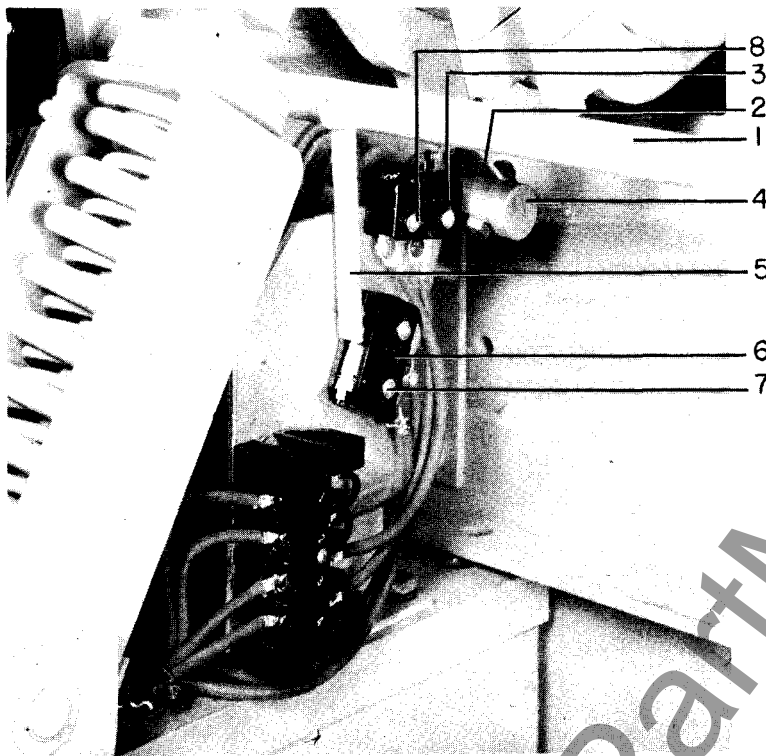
Adjustable Coupling for Making Primary Contact Wipe Adjustment
